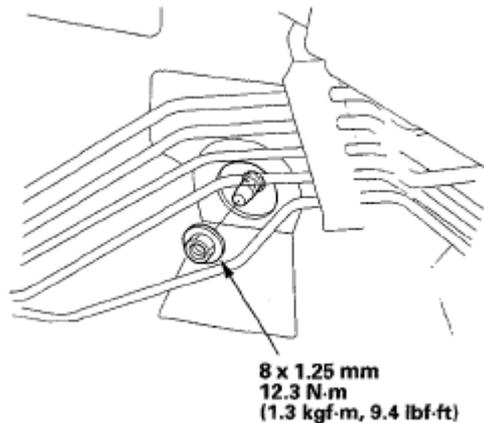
Identifying Mounting Nut Of Heater Unit With Torque Specifications
